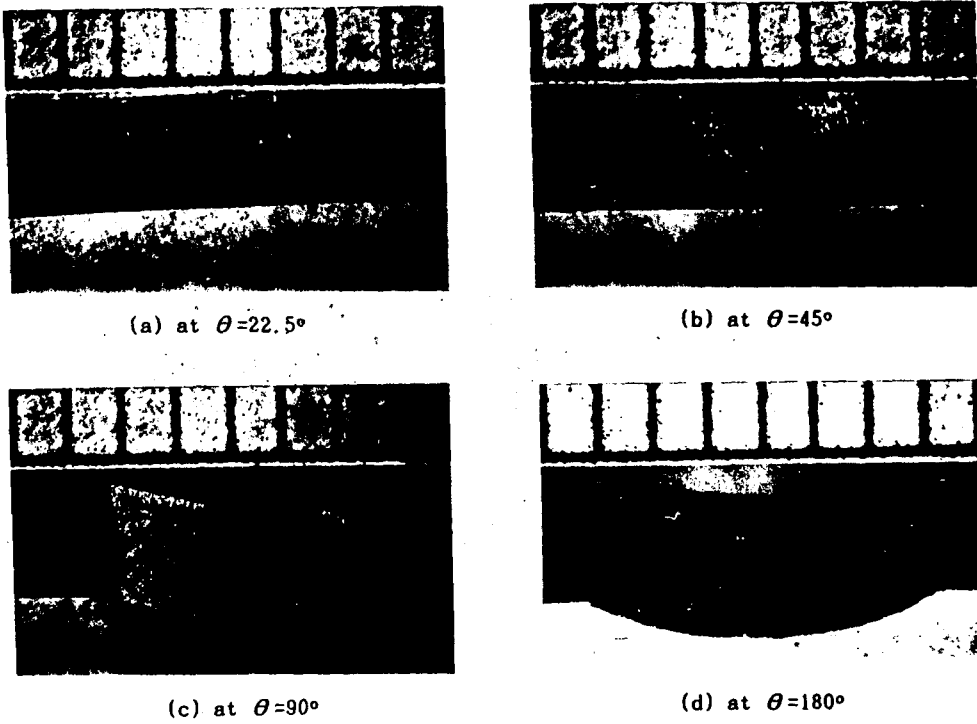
Experimentally observed cross-sections of 6063 Al-alloy welds
